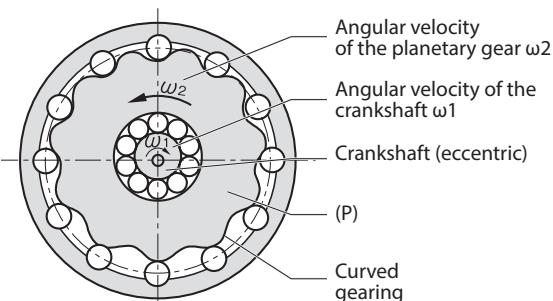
Epitrochoidal planetary gear, circular arrangement of ring gear pins (PIN) combination
